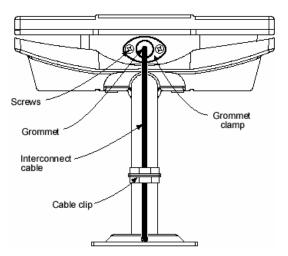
Interconnect Cable Installation to Outdoor Access Point - Bottom View
